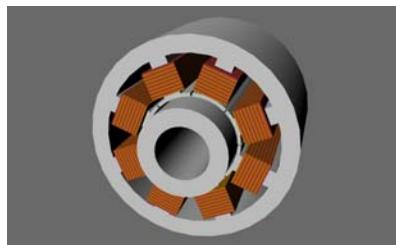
Layout of the Active Magnetic Bearing (3D model)
